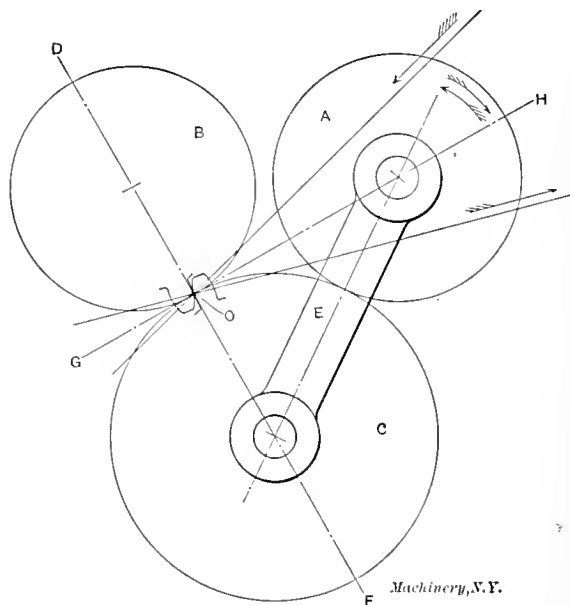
Correct Tumbler Gear Design to run in Both Directions.
